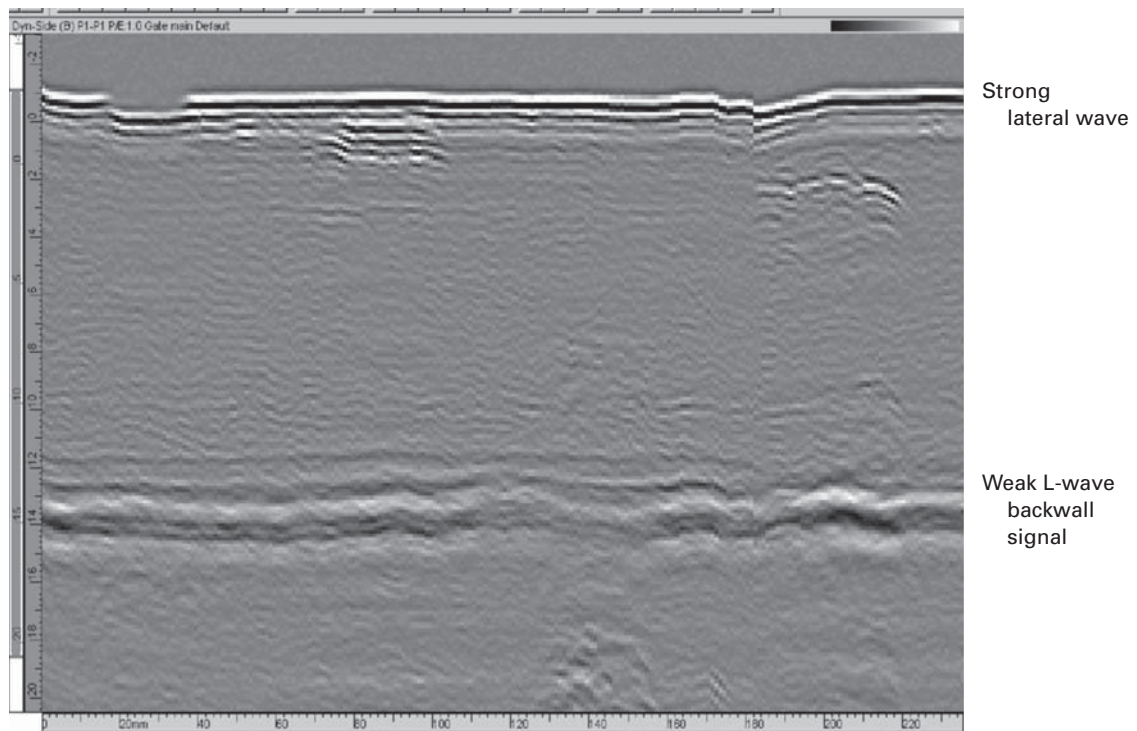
(g) TOFD IMAGE WITH TRANSDUCERS NOT CENTERED ON THE WELD AXIS
